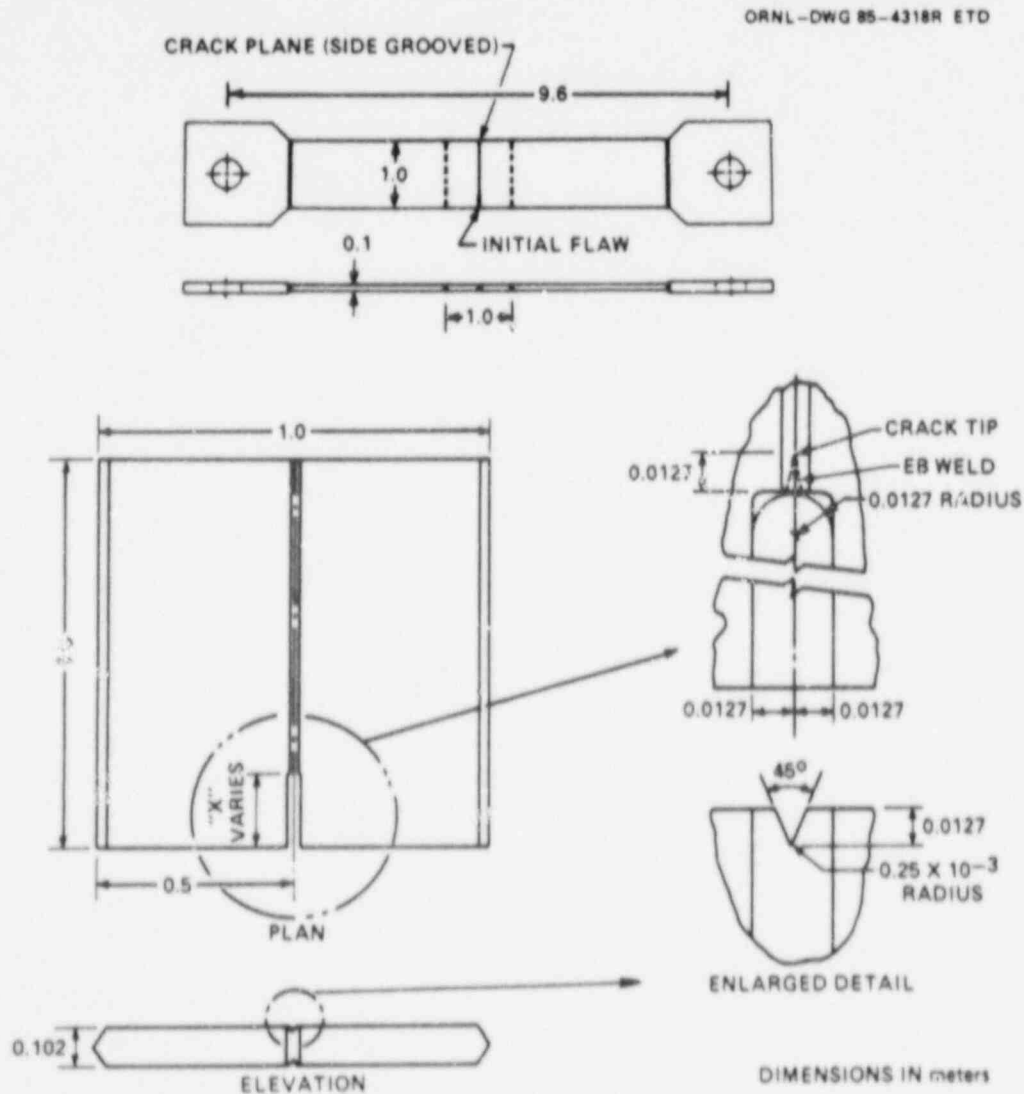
Schematic of HSST wide-plate crack-arrest specimen.
